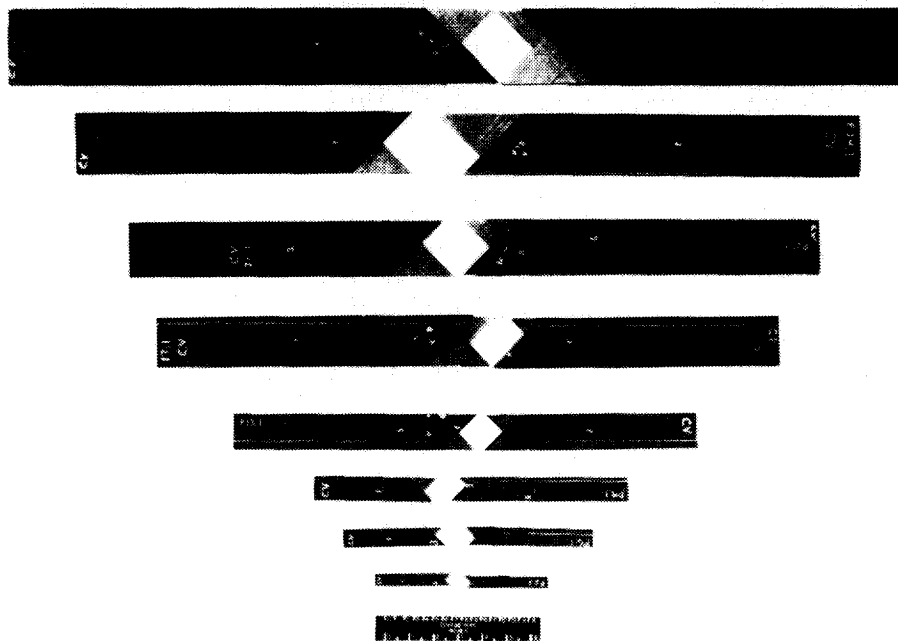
Failed angle ply beams (1/6 through full-scale) tested under flexure.
